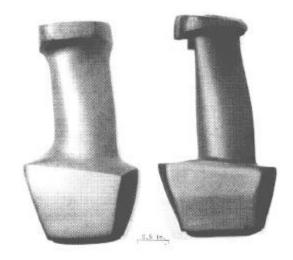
Typical Doncasters T406 second-stage turbine blade forgings before and after airfoil machining.
